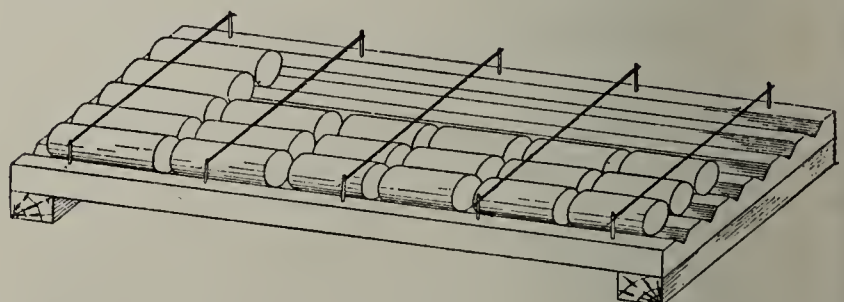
Clay Bars Are Expressed on to a Grooved Board and Cut With Steel Wire as Indicated In Drawing.
